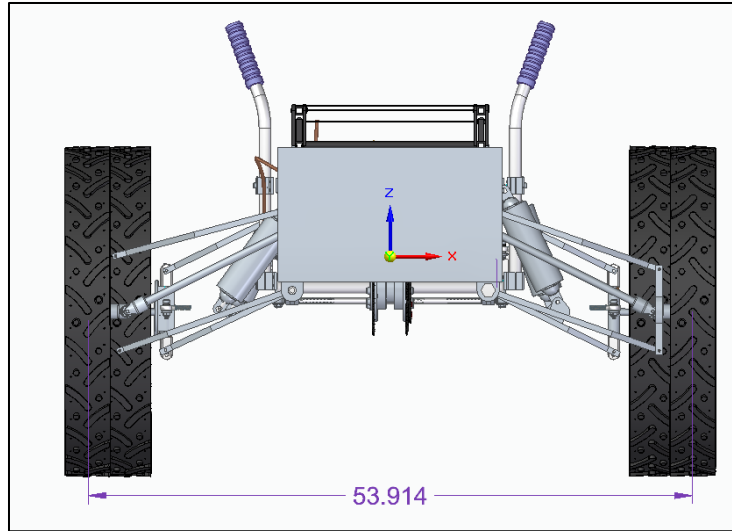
Dimension of outer, rear wheelbase – rear view of Alsvior.
